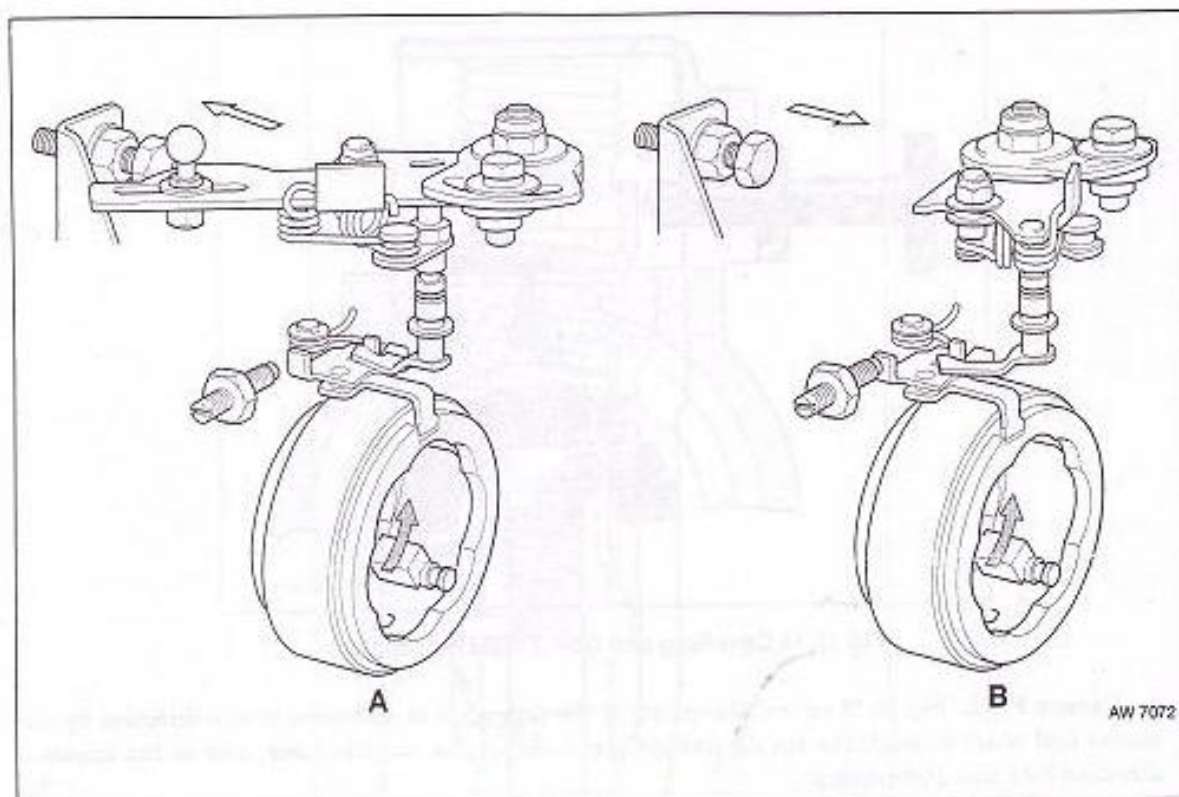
Scroll Plate Mechanism with Mechanical Excess Fuel
